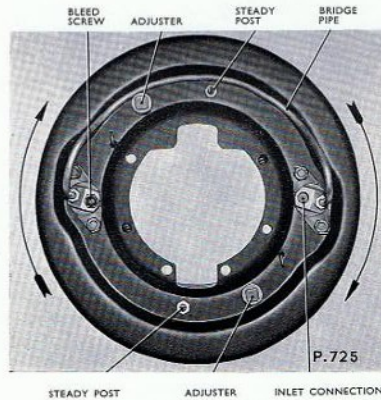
Rear view of the left hand (nearside) front brake assembly. Arrows indicate the direction of drum rotation.
